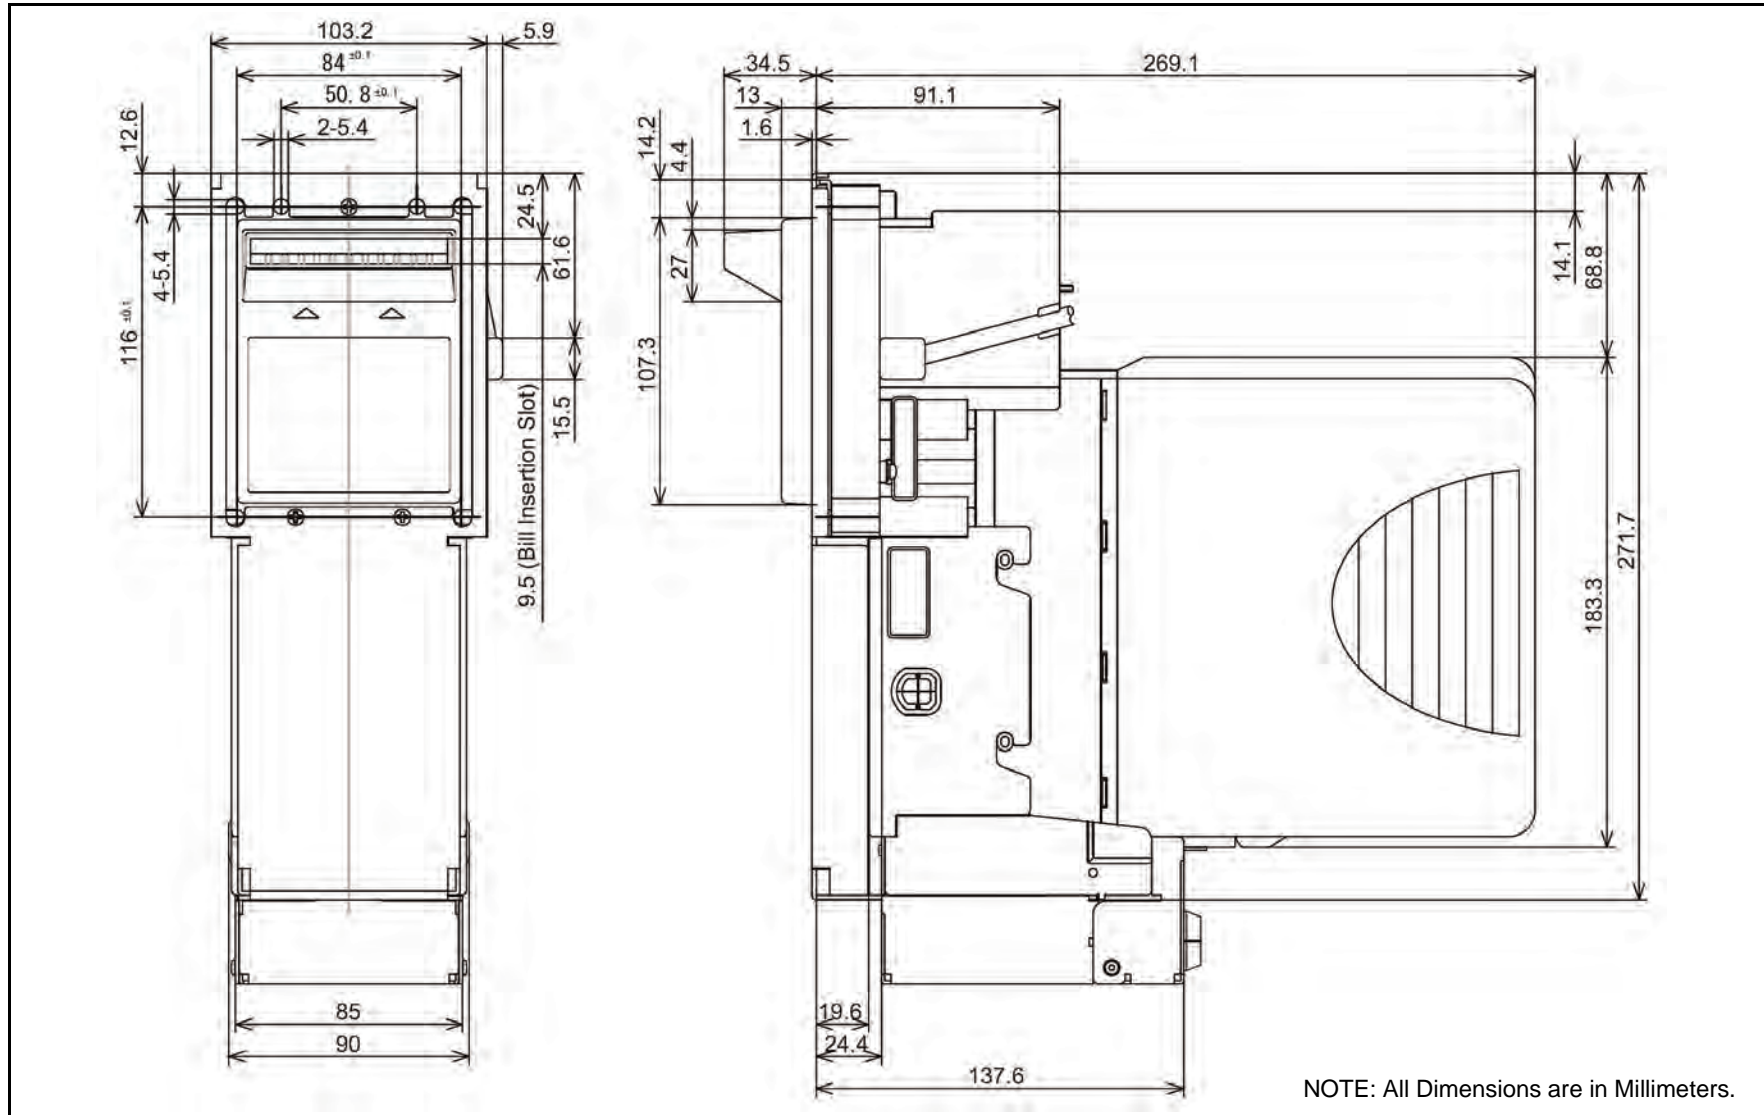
DBV-30X -SD Bill Validator Dimensions with a Type “D” Note Cash Box & Lock Assembly (Part 8)
